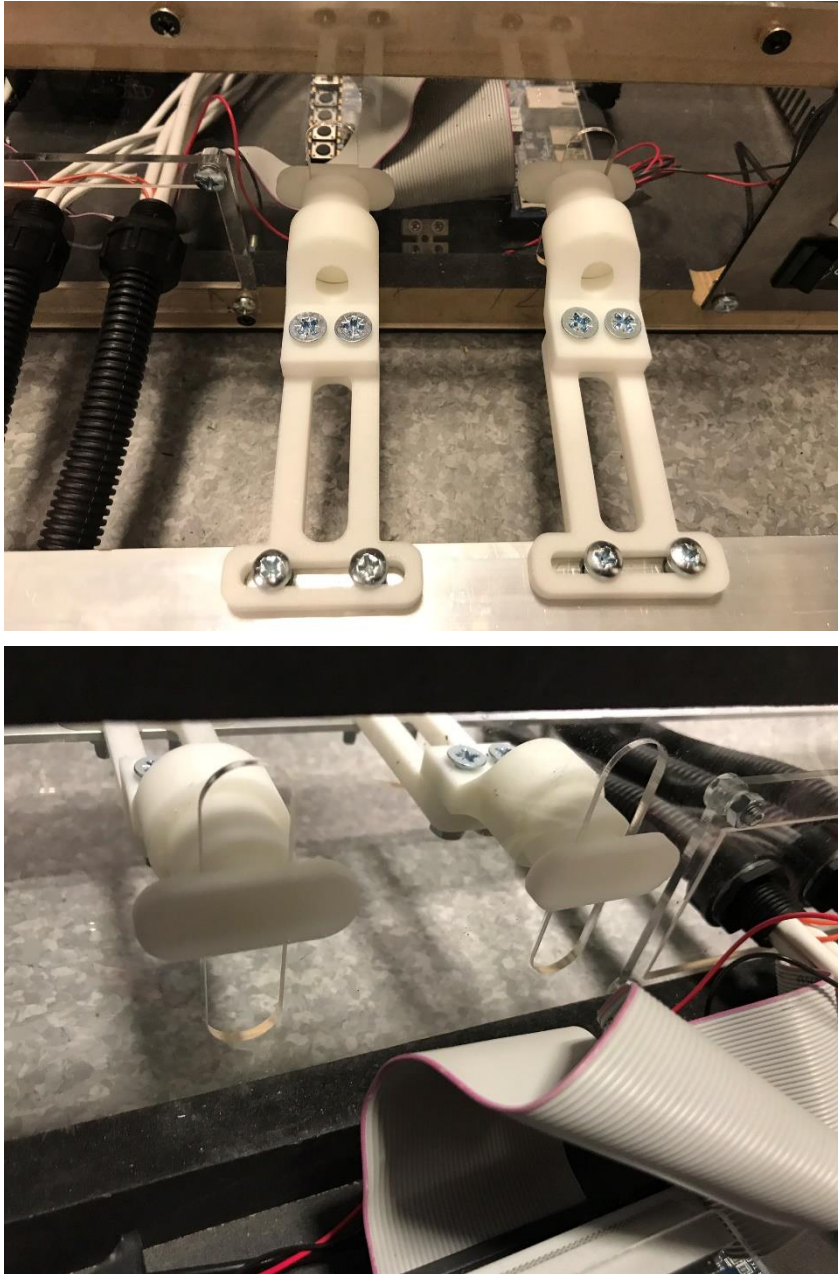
Manufactured calibration homing jig with rotating locking tabs
